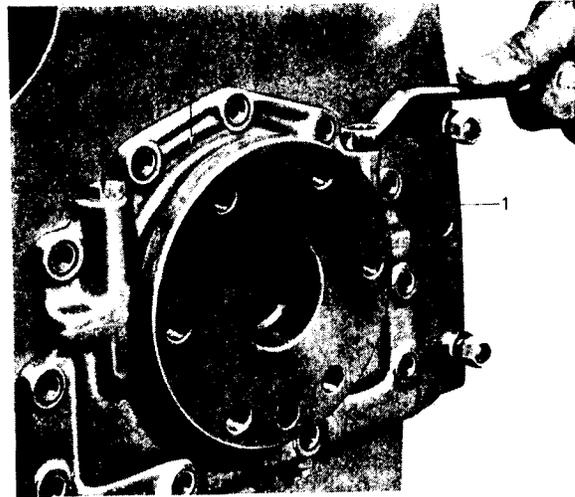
Tightening Oil Seal Housing Setscrew.
